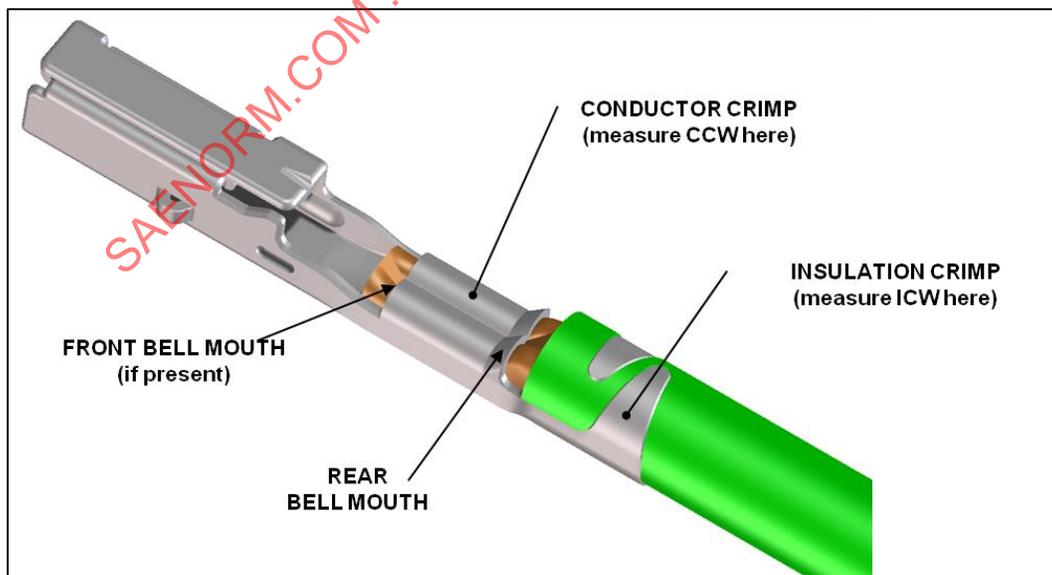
B - PARTS OF A CRIMP (ISOMETRIC VIEW)
